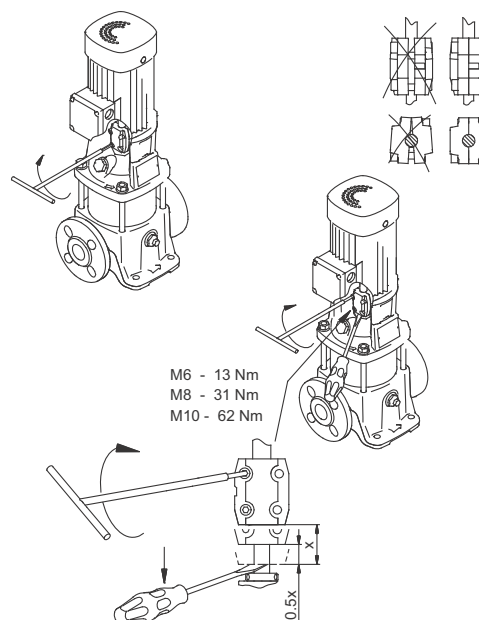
Coupling adjustment all CR, CRI, CRN, CRT
